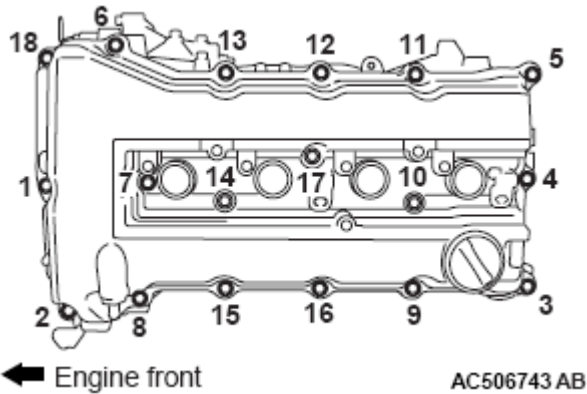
Loosening Rocker Cover Assembly Mounting Bolts
